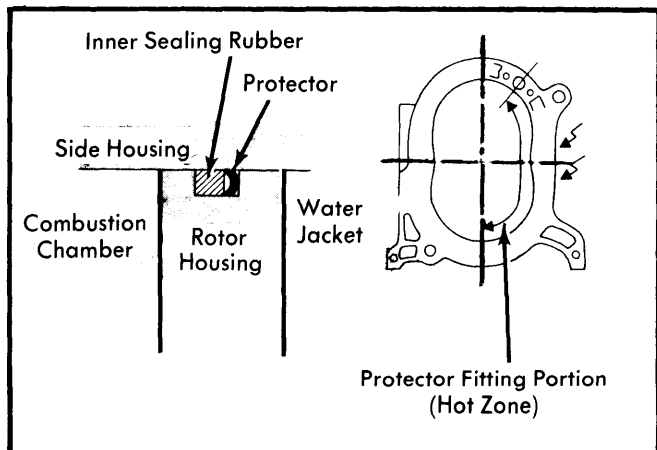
Installing Protectors for Inner Sealing Rubbers
